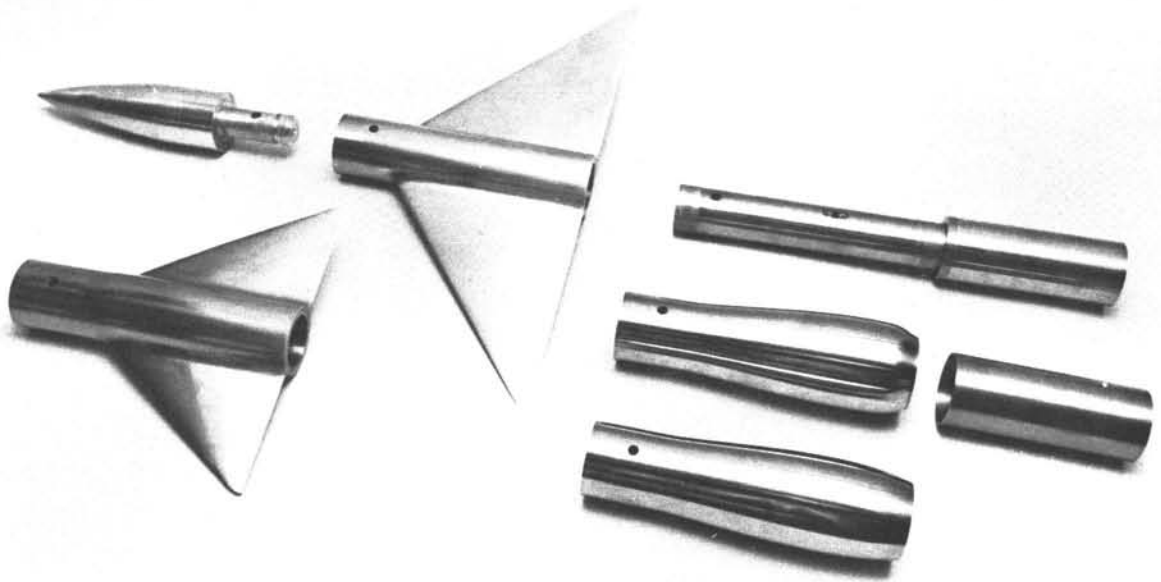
MODEL PARTS BEFORE ASSEMBLY
